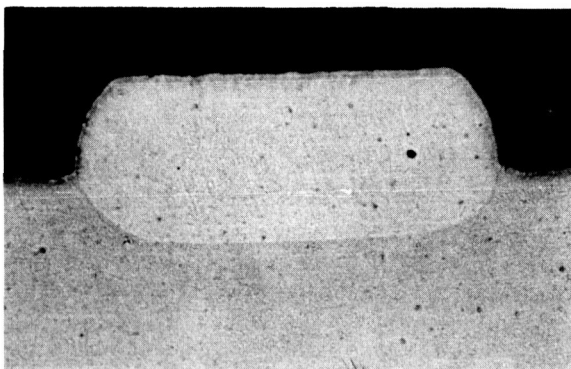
shows the weld joints produced at the optimum weld settings for the 180 degree opposed electrode position. These are also typical of
